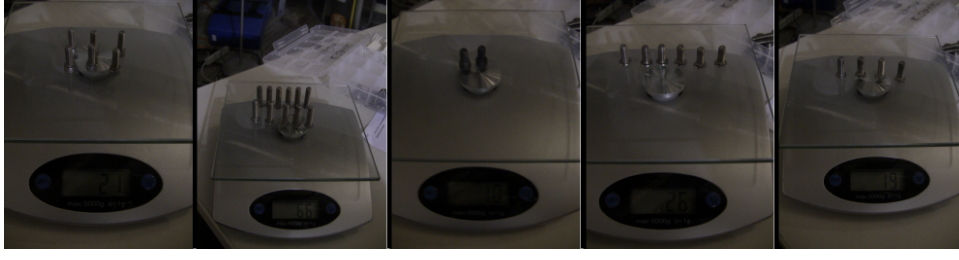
Shoulder Bracket Screws masses A. Torso Screws (6 of 12) B. Long Screws (12 of 24) C. Kinect Screws D. Top Plate Screws E. Bottom Plate Screws
